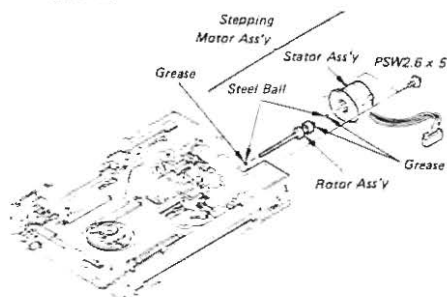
Stepping Motor Ass'y (Stator Ass'y and Rotor Ass'y) Replacement
